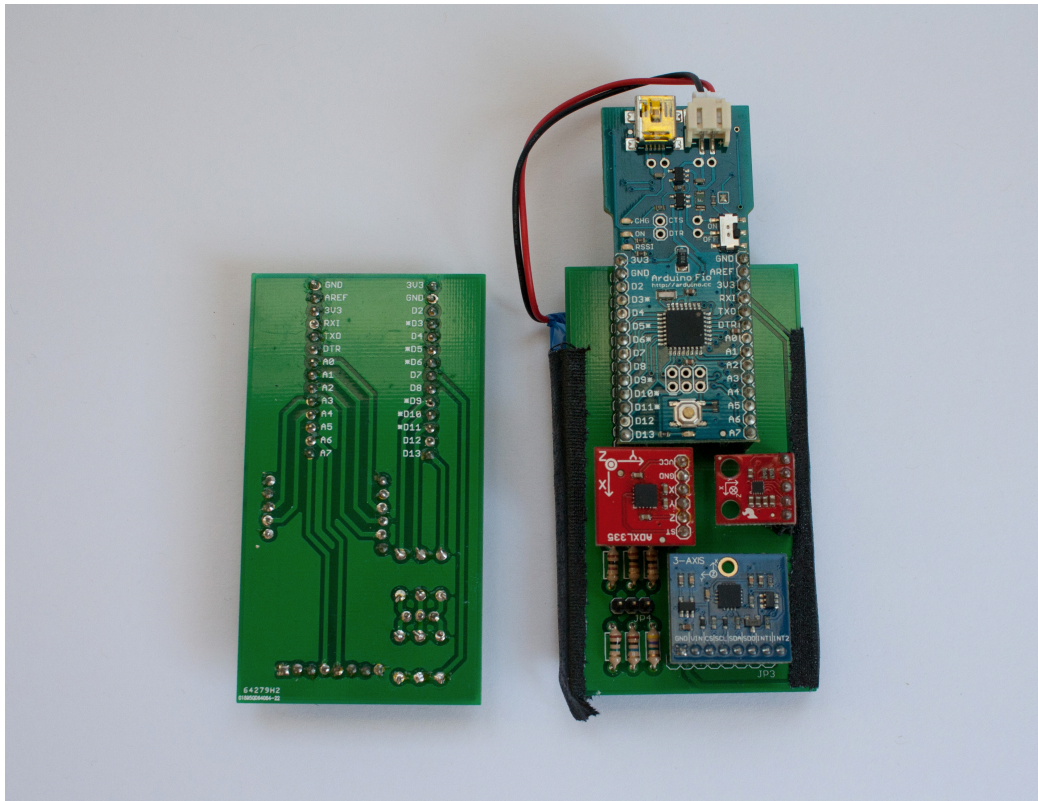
Custom Arduino Fio PCB Shield for Fluid
